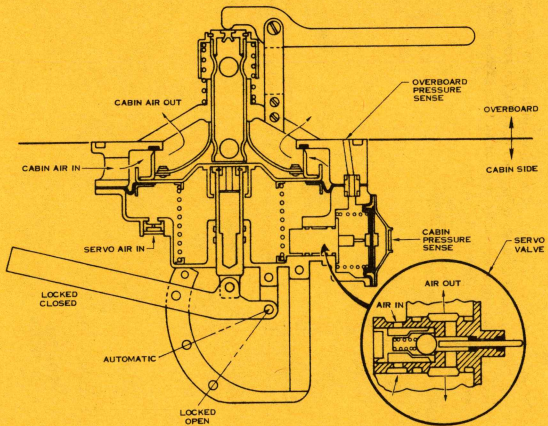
Sectional View of Cabin Dump Valve Item 307
